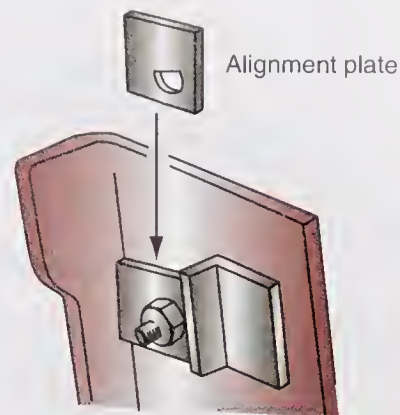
Alignment plate on upper control arm attaching nut.
